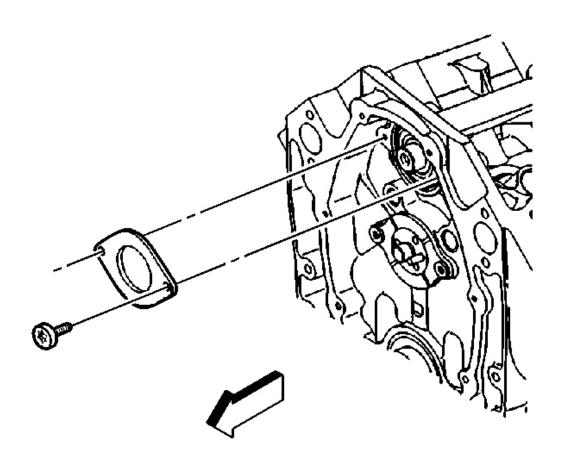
View of Balance Shaft Retainer & Bolts Courtesy of GENERAL MOTORS CORP.
